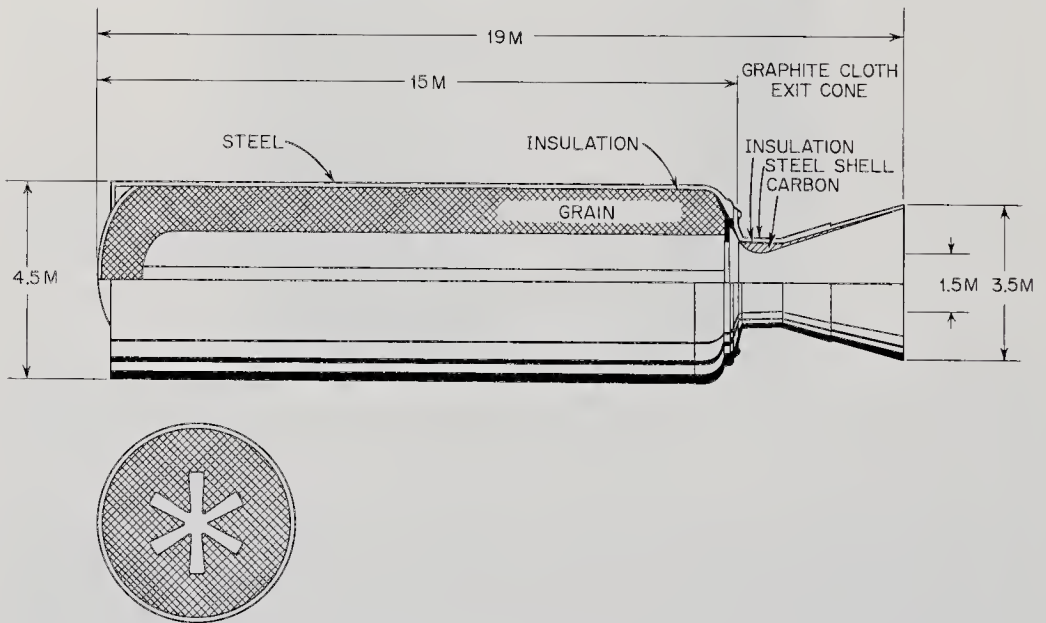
Drawing of a large solid chemical rocket motor. The thrust of such a motor would be approximately 500,000 kg. Dimensions are in meters.
